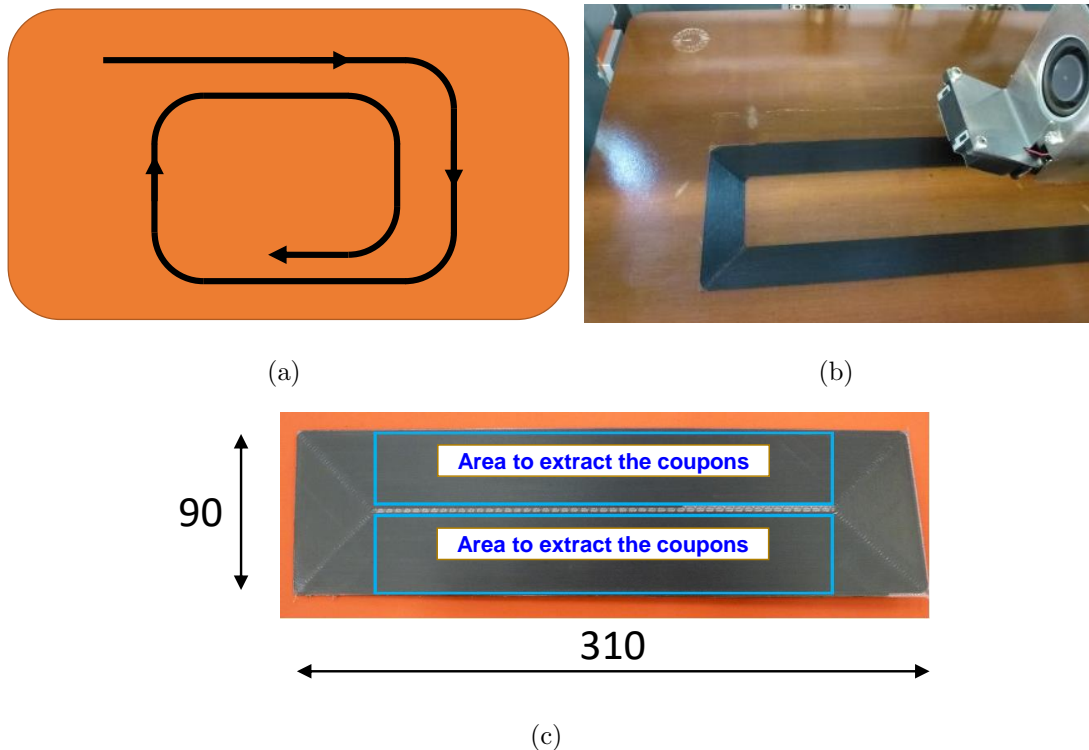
(a) Scheme of the carbon fibre composite printing process.(b) Carbon fibre composite printing process. (c) Zones of the carbon fibre panel used to extract the coupons, dimensions included are in mm.
